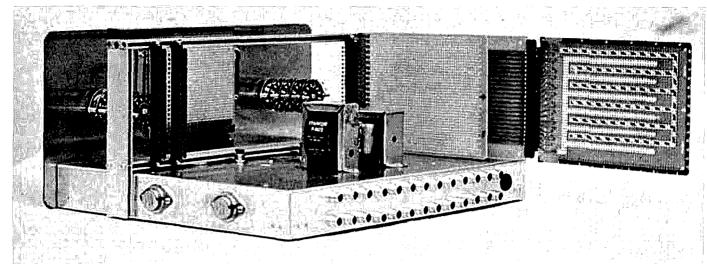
Rear view of digital accessory showing the mounting of Vectorboard to hold Minitron readouts and T-struts for other circuit boards prior to above-circuit chassis wiring.
